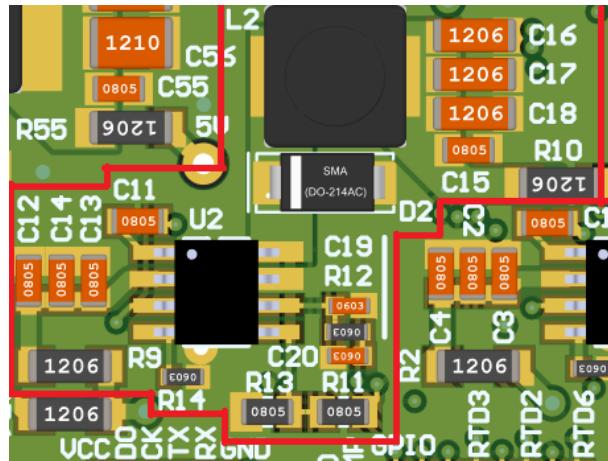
Main radio transceiver regulator circuit on the PCB.
